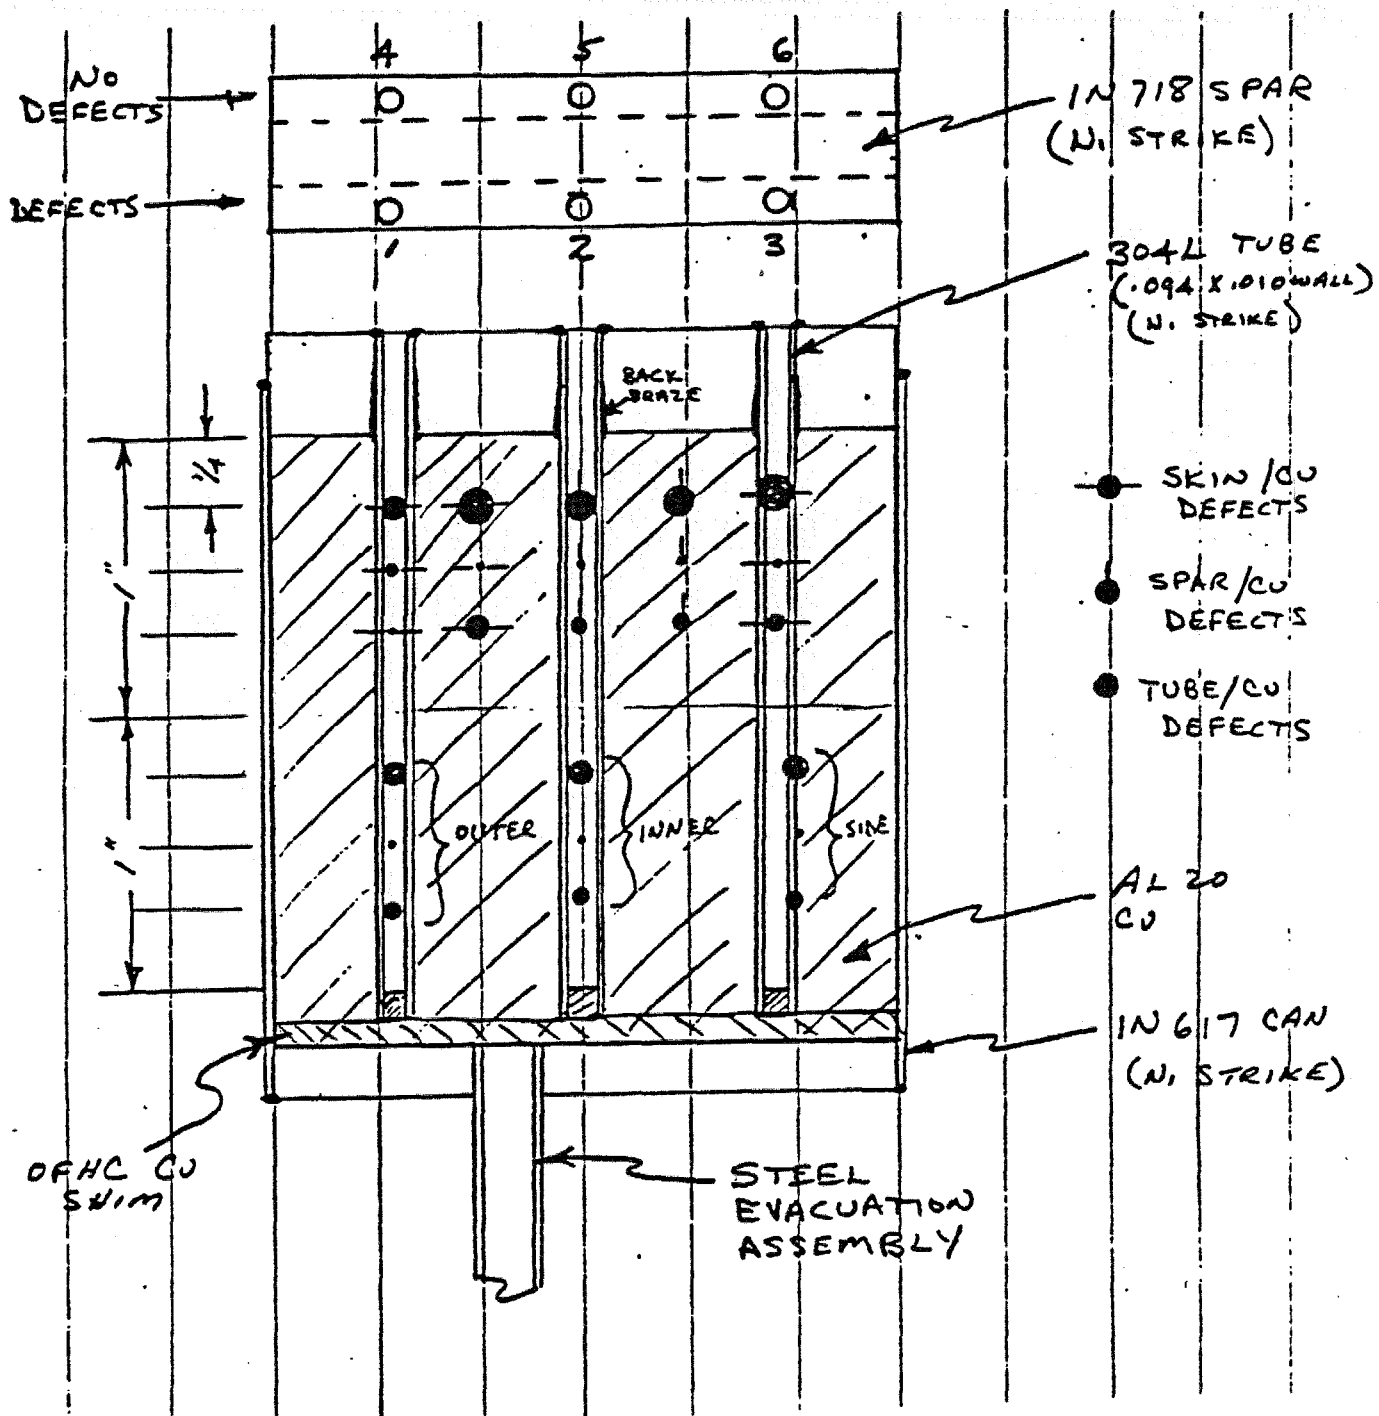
Schematic of NDE-4 specimen showing location of Microbrazed stop-off/mica flake defects.
